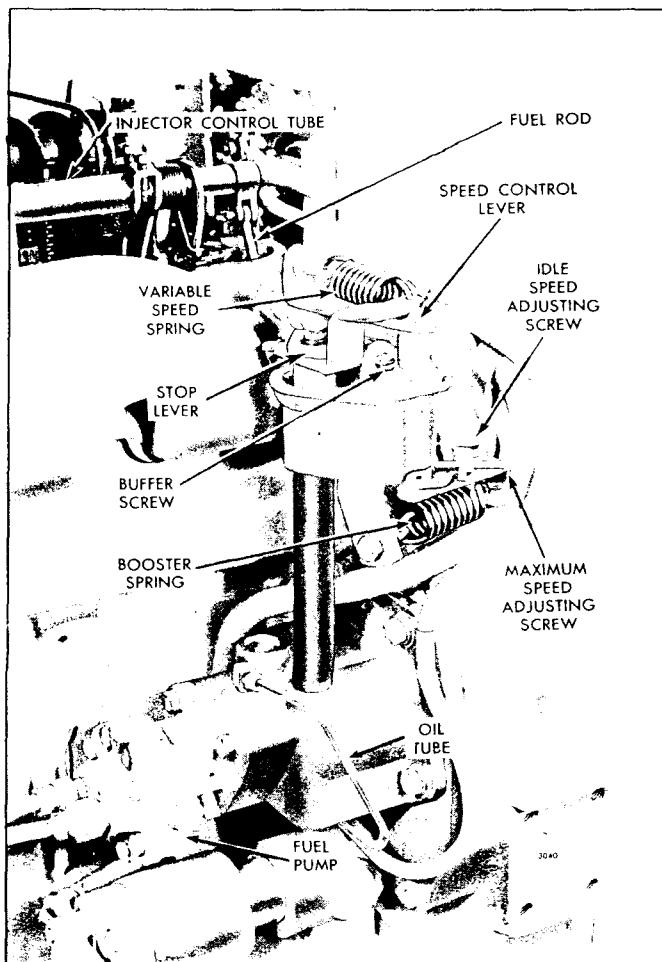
Variable Speed Open Linkage Governor Mounted on Engine
